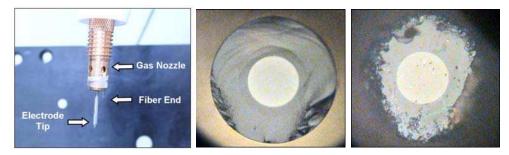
Optical fibre embedded in a TIG welding torch (left), and view of the fibre's end before and after more than 100 welding trials
